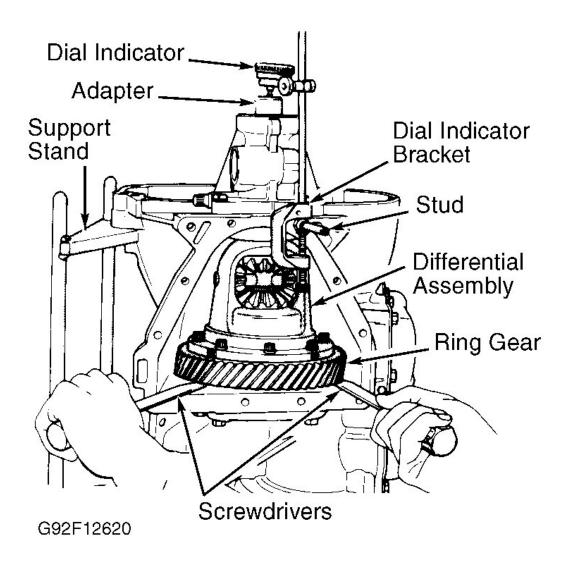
Checking Differential End Play Courtesy of CHRYSLER CORP.
